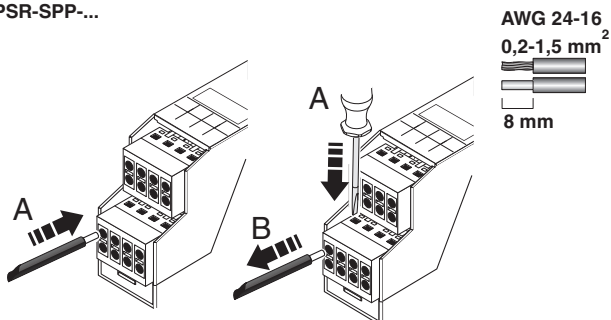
Connecting the cables for PSR-SPP-... (Spring-cage terminal block)
